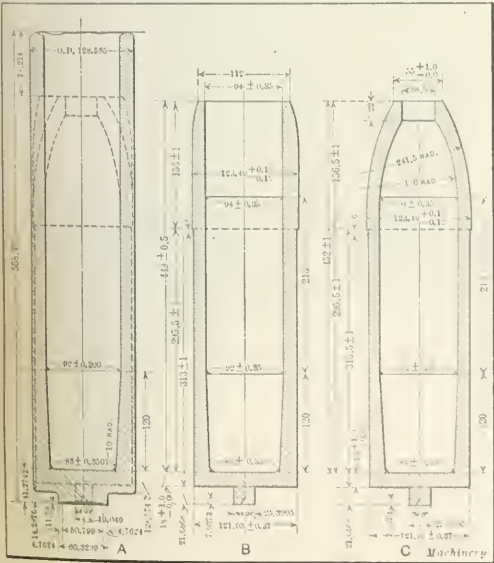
Principal Dimensions of Forging and Condition of French 120-millimeter High-explosive Shell after First Series of Machining Operations
